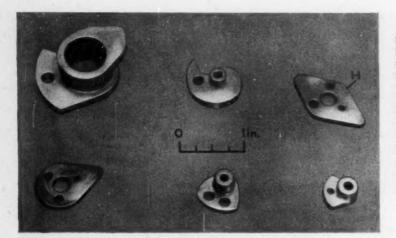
Machines and Instruments Produced by the Bell Punch Co., Ltd., Incorporate Cams. which are Machined from Bar Stock or Made by Blanking, for Example. The Cam Profiles must be Smoothly and Accurately Finished, and the Peripheries of the Cams Shown are Ground with the aid of Special Equipment Developed by the Company
